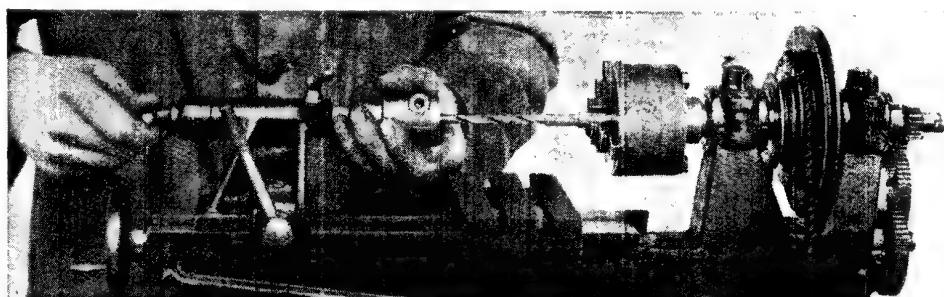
Drilling is here seen in progress on a lathe. The drill is held in the three-jaw chuck on the mandrel
